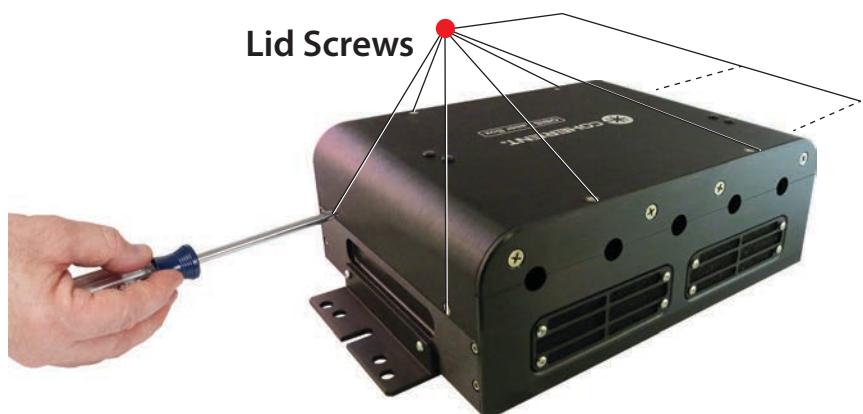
OBIS Laser Box Removing the Laser Box Lid
